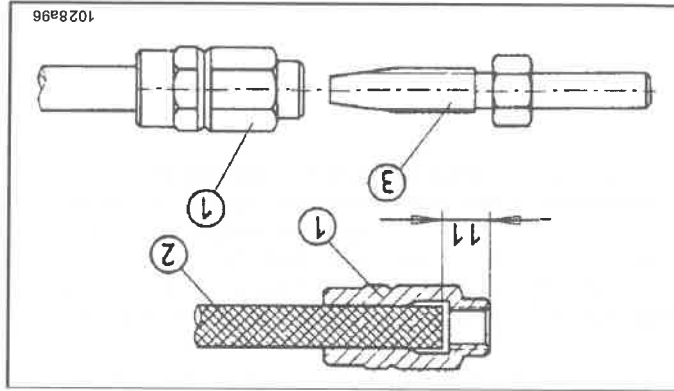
Pre-assembly of the threaded sleeves and hose studs onto the main line
